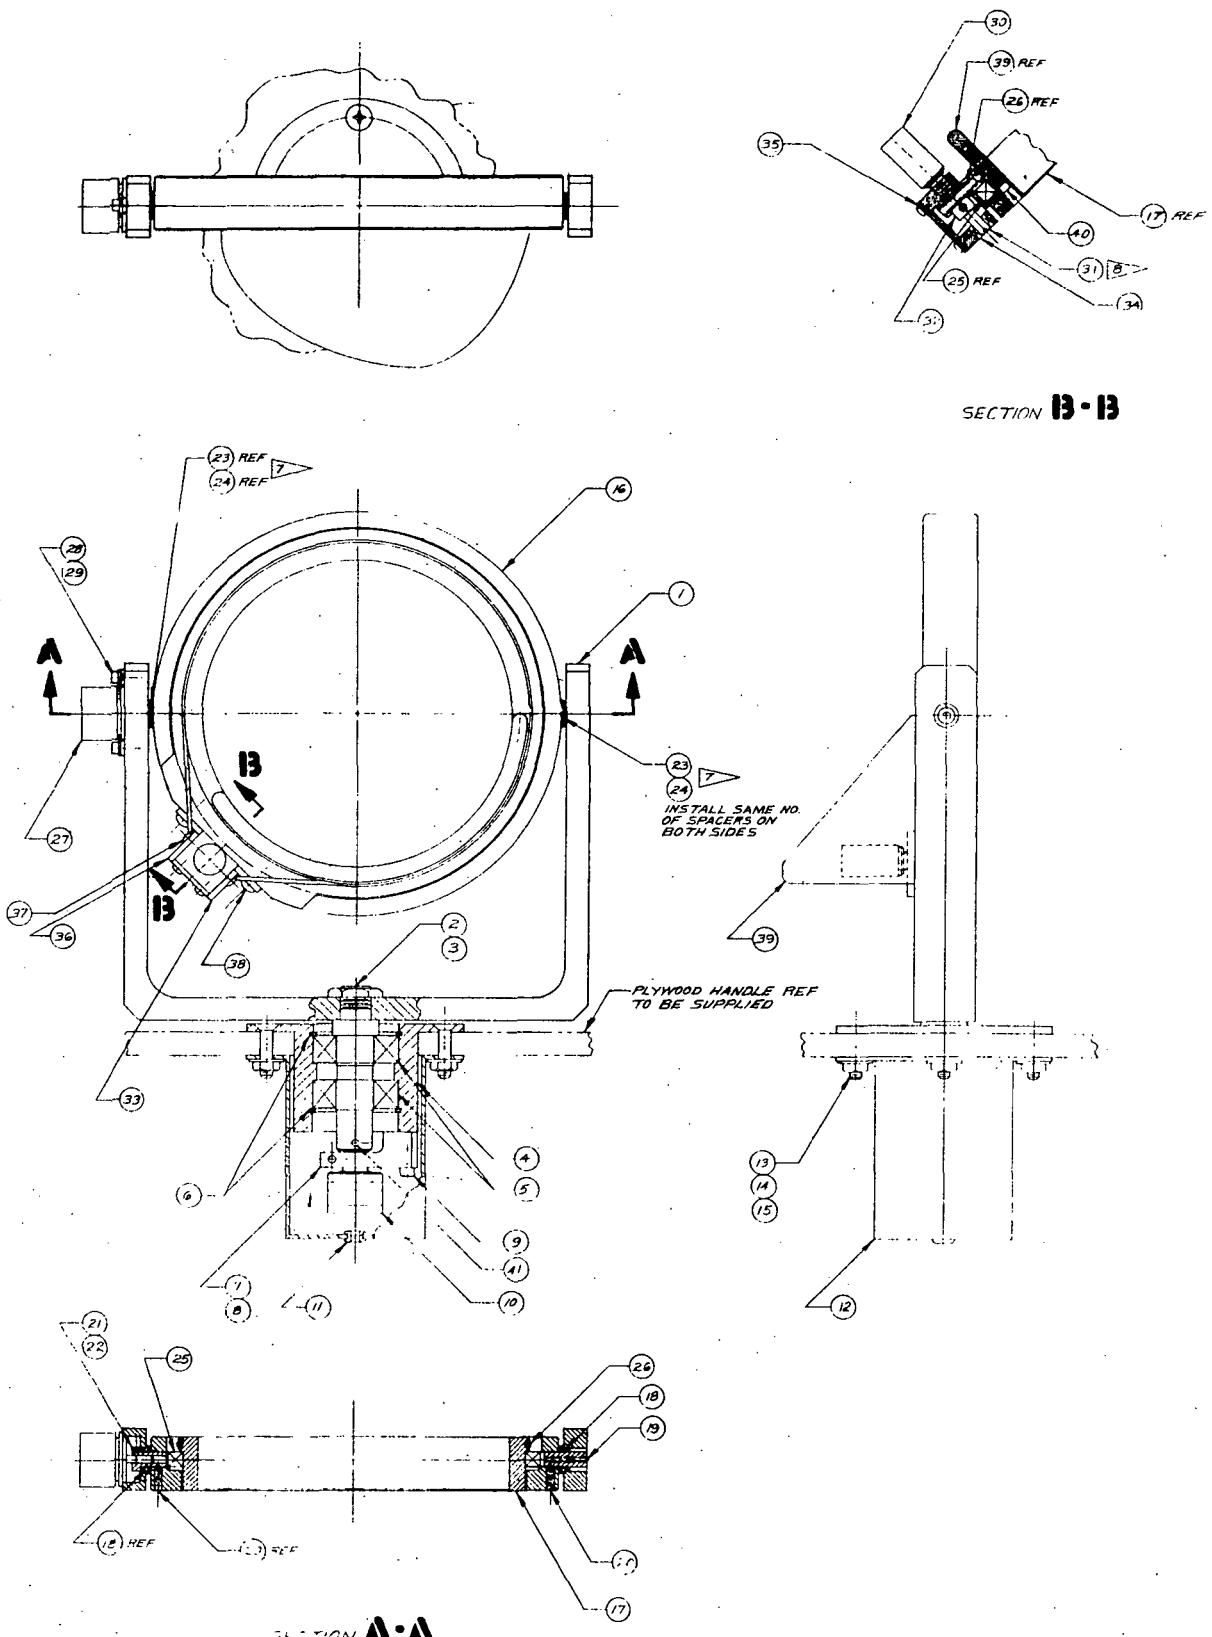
Terminal Pointer Hand Controller Prototype Assembly Drawing
